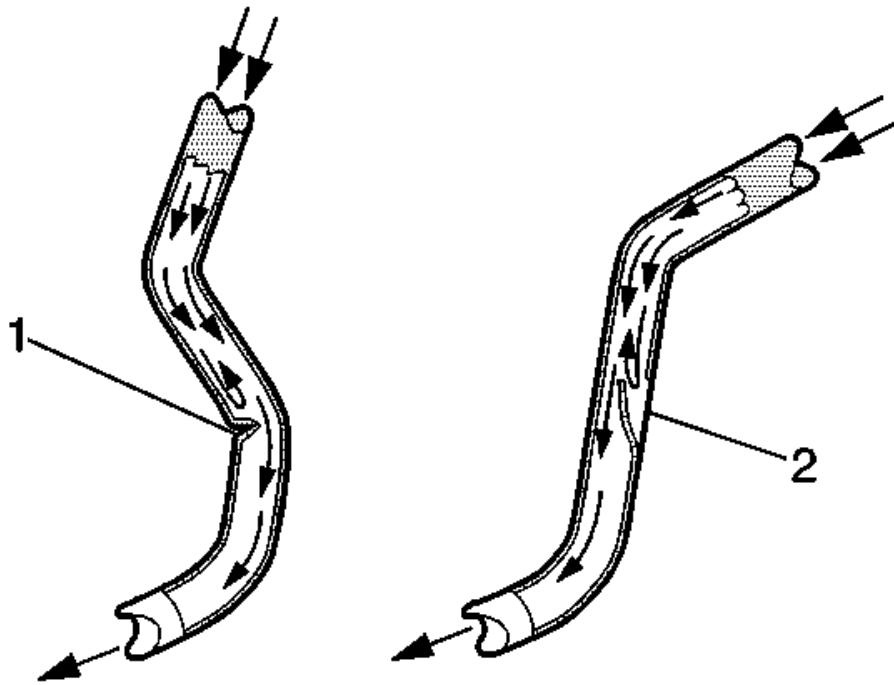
Identifying Flexible Brake Hose Failure Conditions
